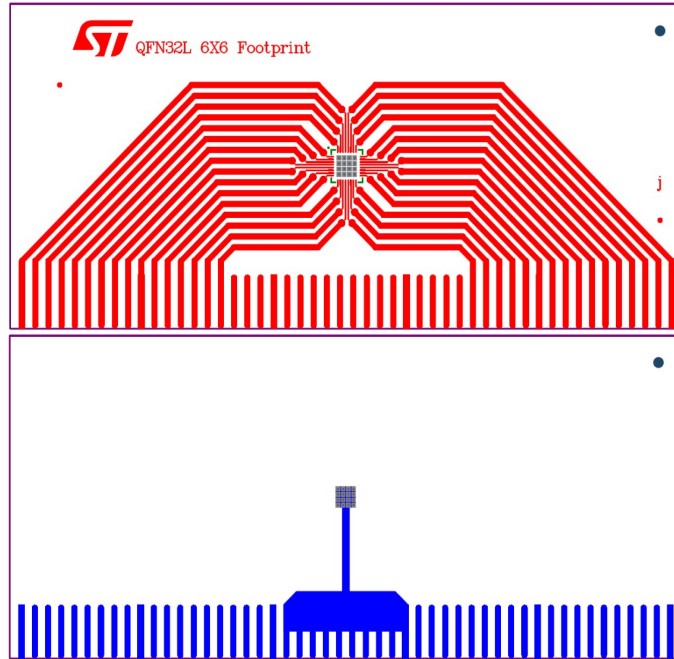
QFN (6x6 mm) PCB 2 cm<sup>2</sup>
